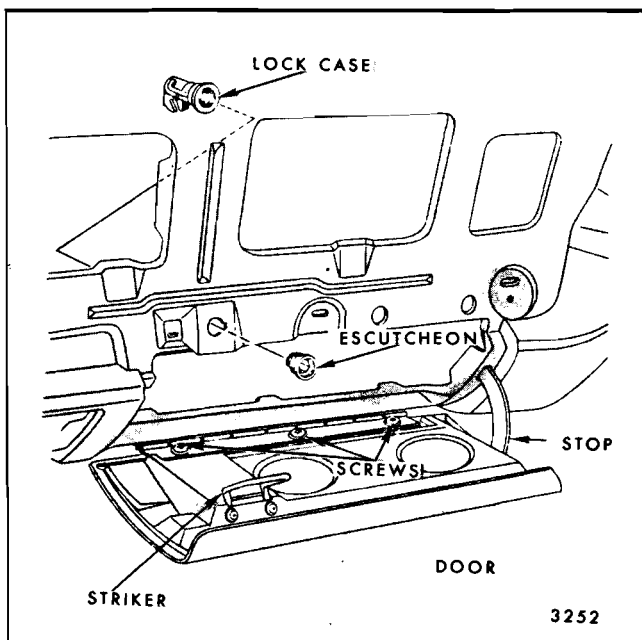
Instrument Panel Compartment Door - Buick "A & E" Styles
